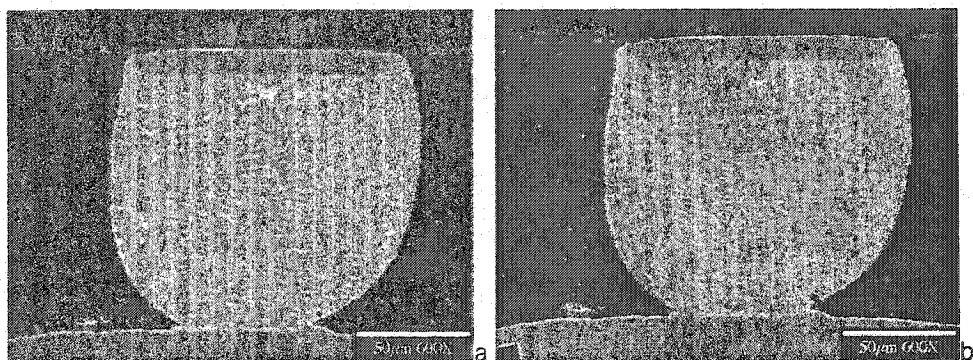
Secondary SEM of M54, solder joint B (a) initial (b) after failure
